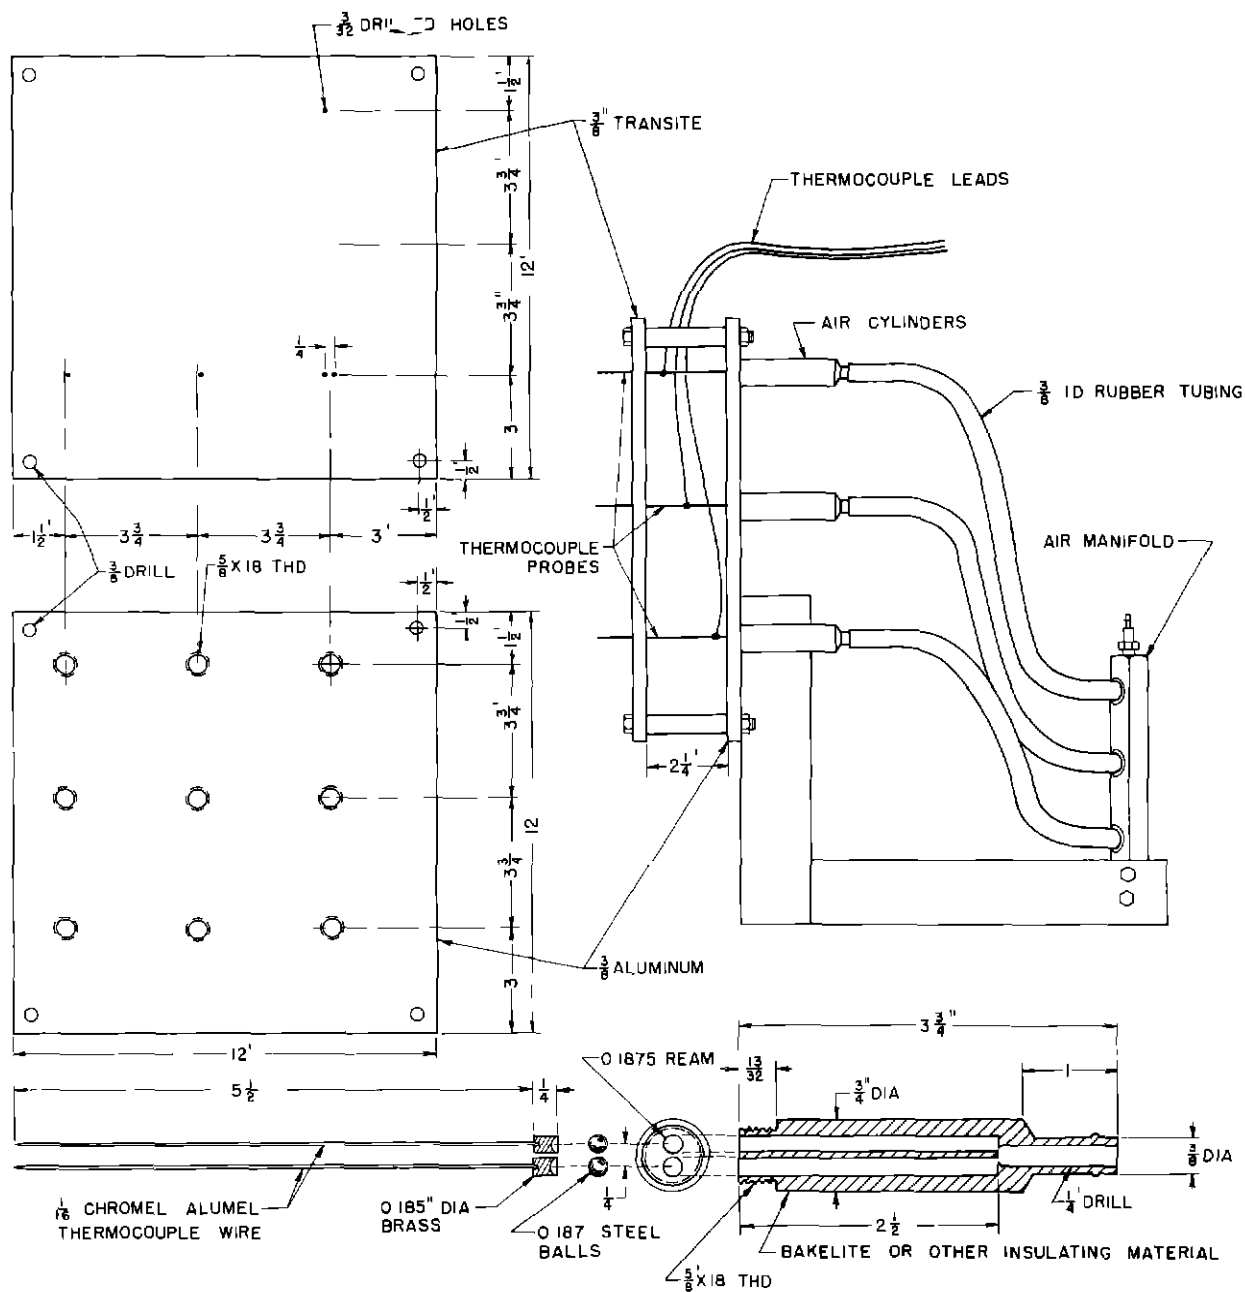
DETAILS OF THERMOCOUPLES AND SUPPORTING FIXTURE
